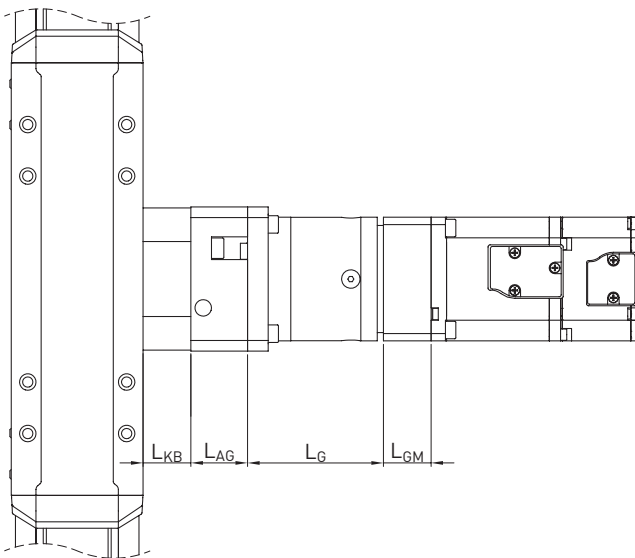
Motor connection of cantilever axis HC with gearbox
